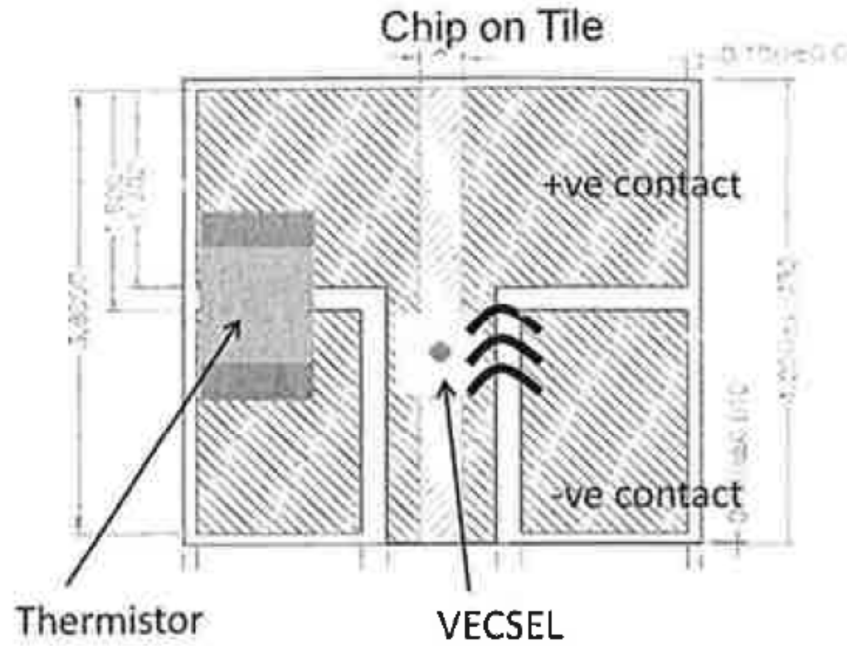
Schematic drawing of EP-VECSEL sample (top view).
